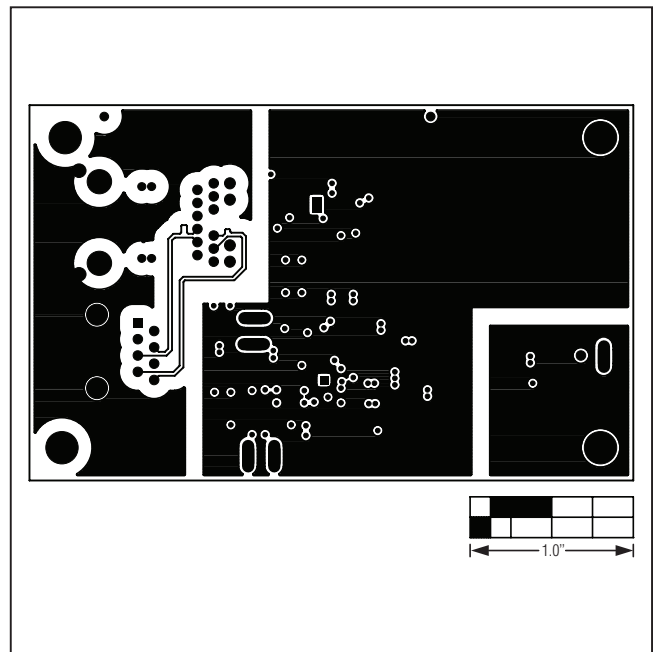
MAX5974E EV Kit PCB Layout—Signal Layer 3
